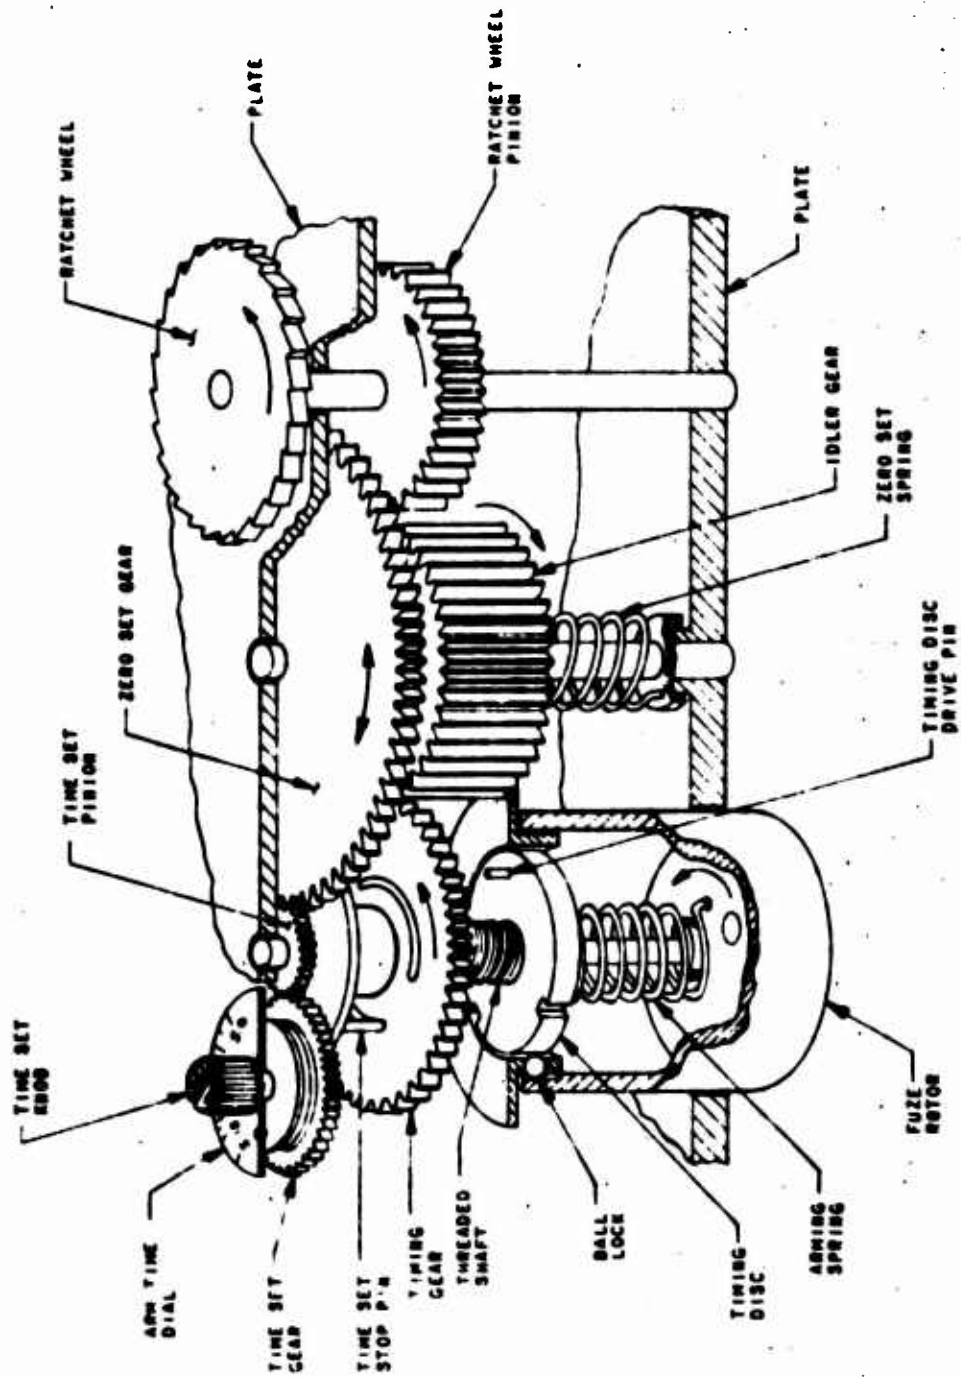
EMT Fail-Safe Mechanical Set-Time Mechanism
